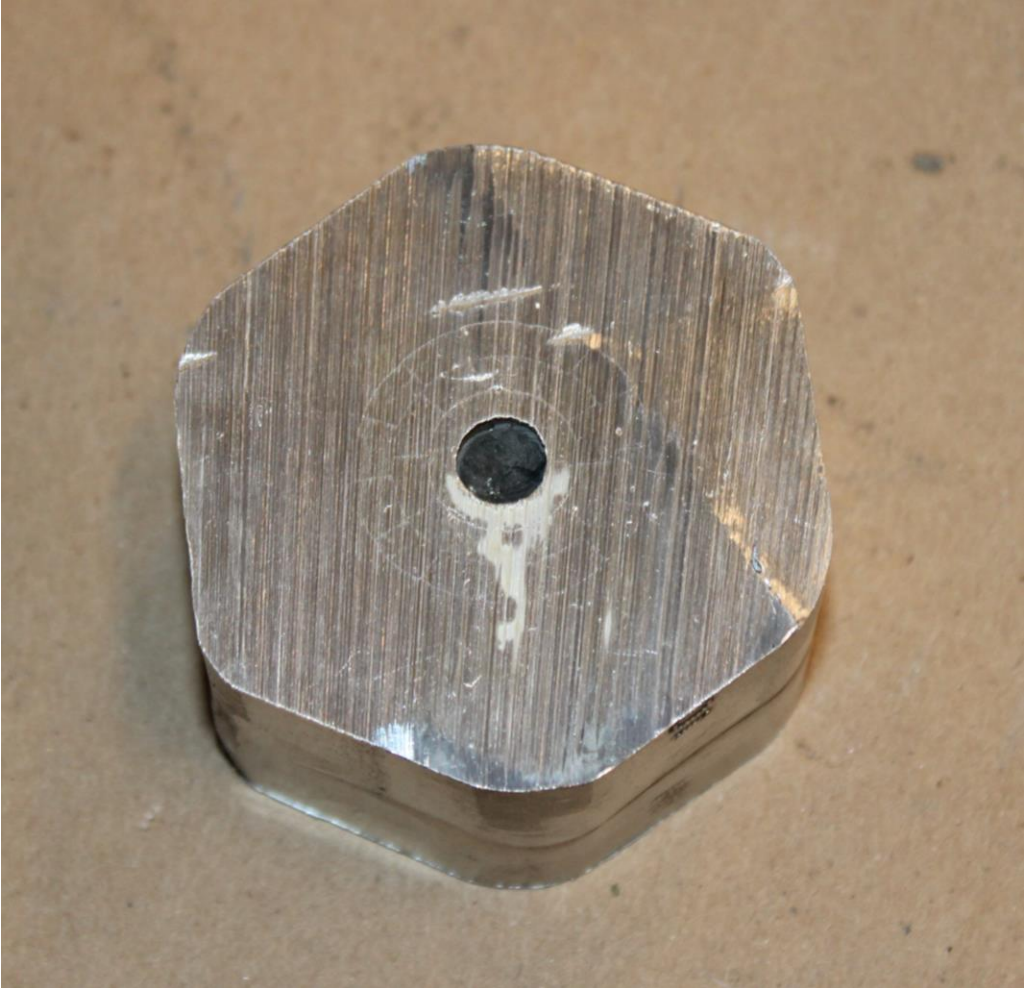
Sample 2 - Location of Failure – Outside of Steel Pin
